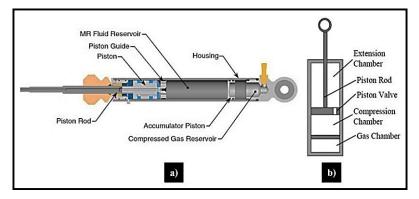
a) Typical mono tube damper, b) Principle of monotube passive damper [16-17]
